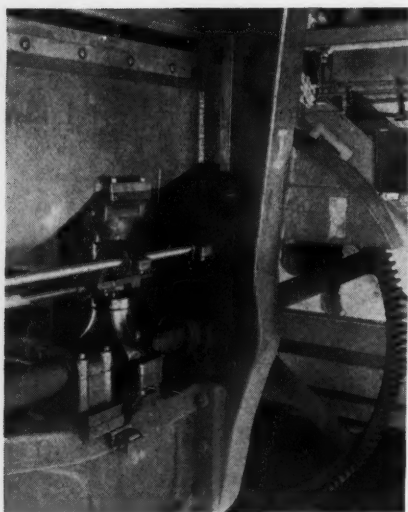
The ram and gear of this 10-ft. bending brake were speedily and efficiently repaired by arc welding.
